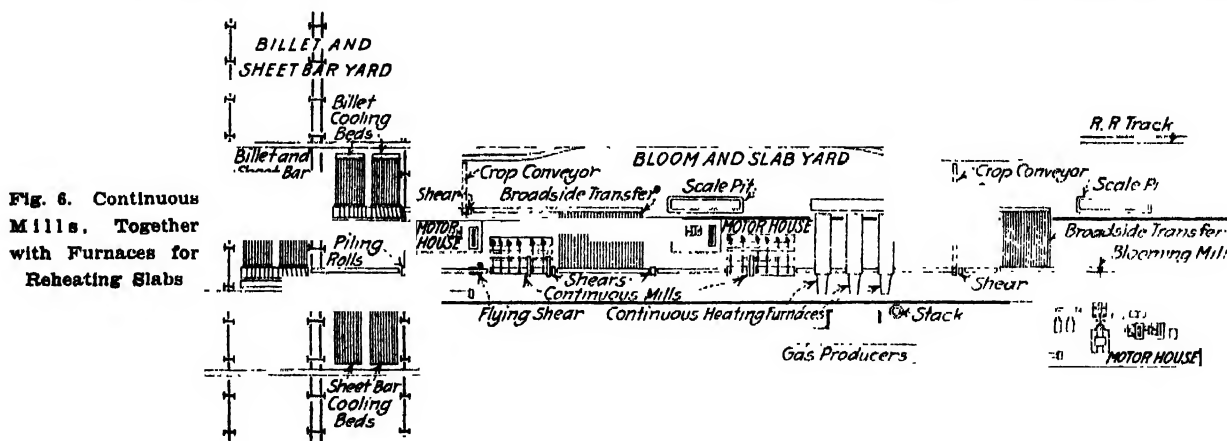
Continuous Mills. Together with Furnaces for Reheating Slabs
